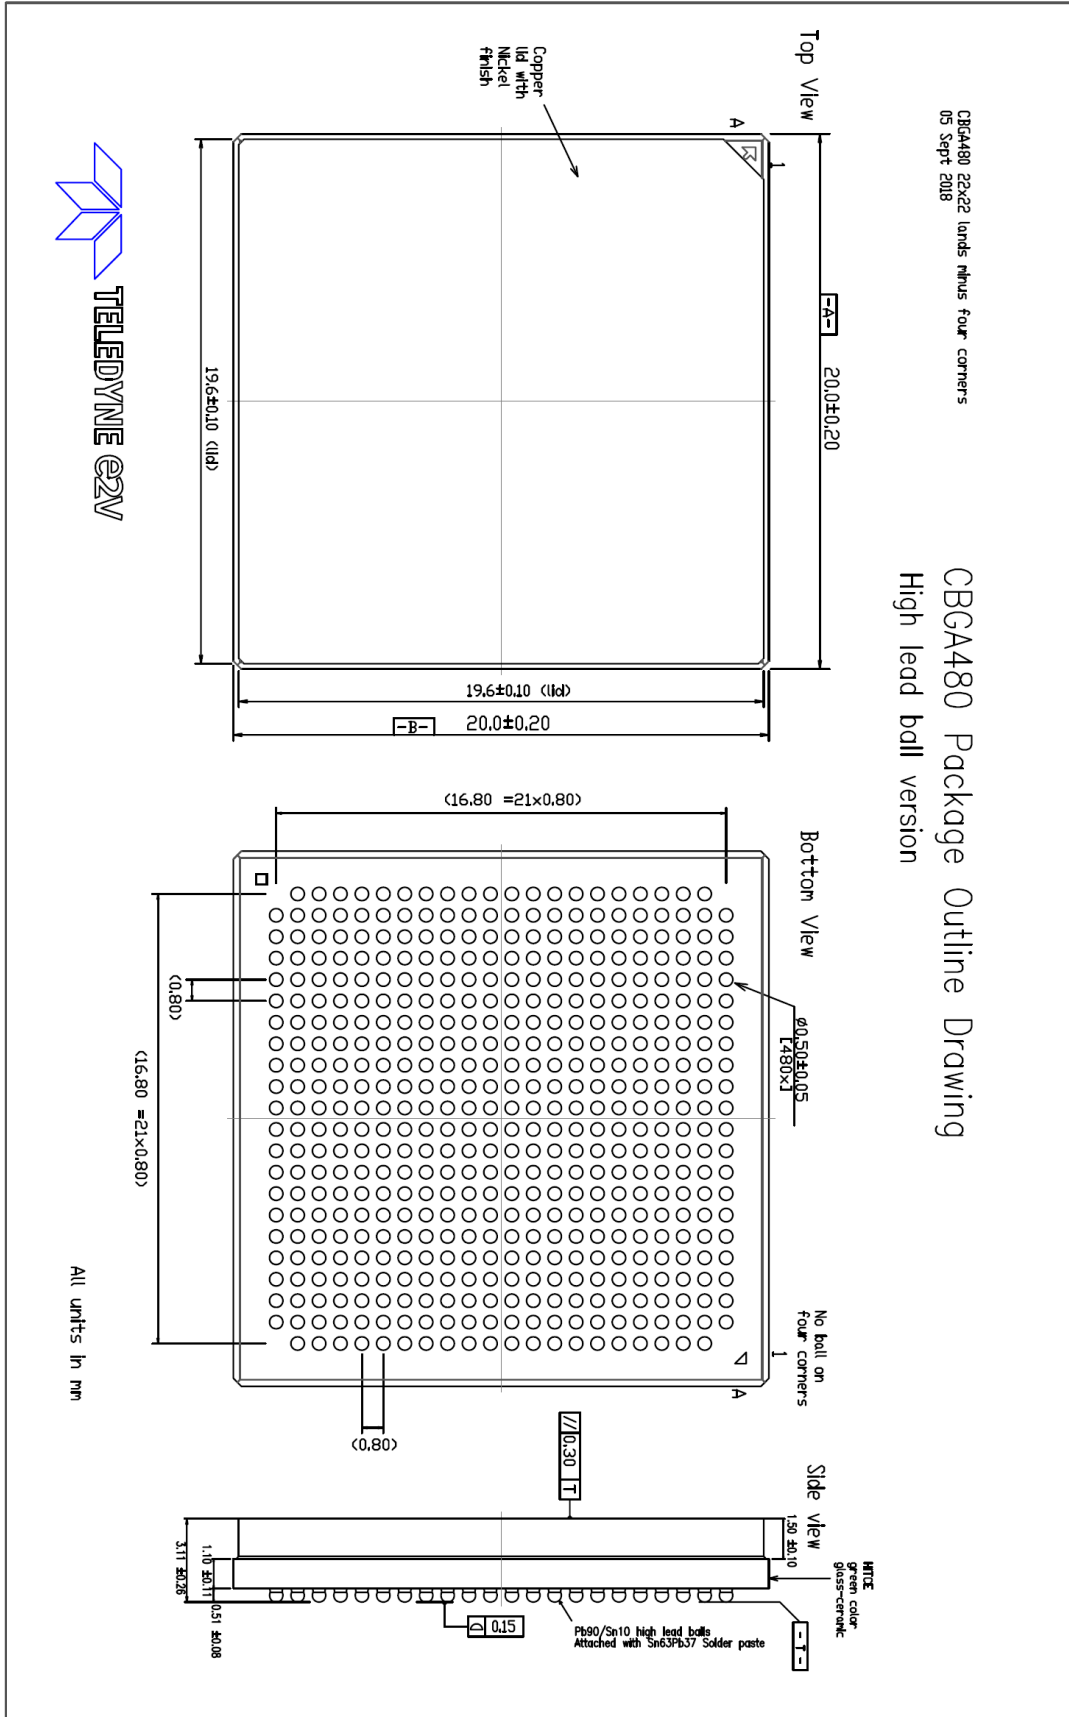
Mechanical outline drawing with Pb90Sn10 balls
